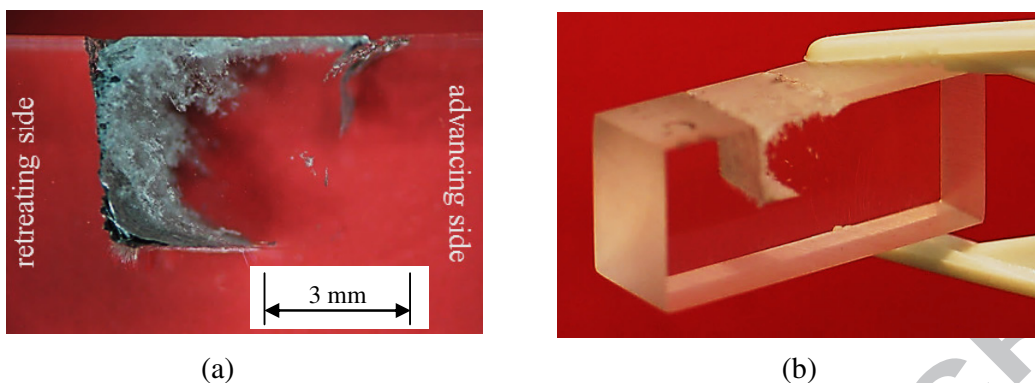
Two (a) and three (b) dimensional images of tool 1 weld
